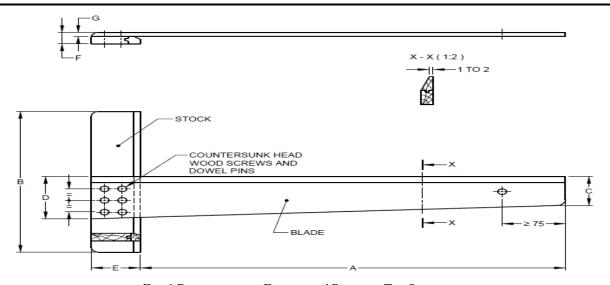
DIMENSIONS OF ENGINEERS' PATTERN TEE SQUARES
